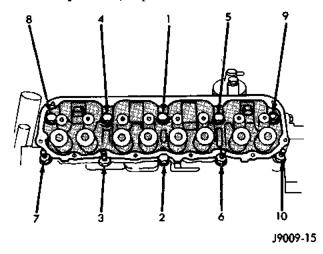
Engine cylinder head Bolt Tightening Sequence
